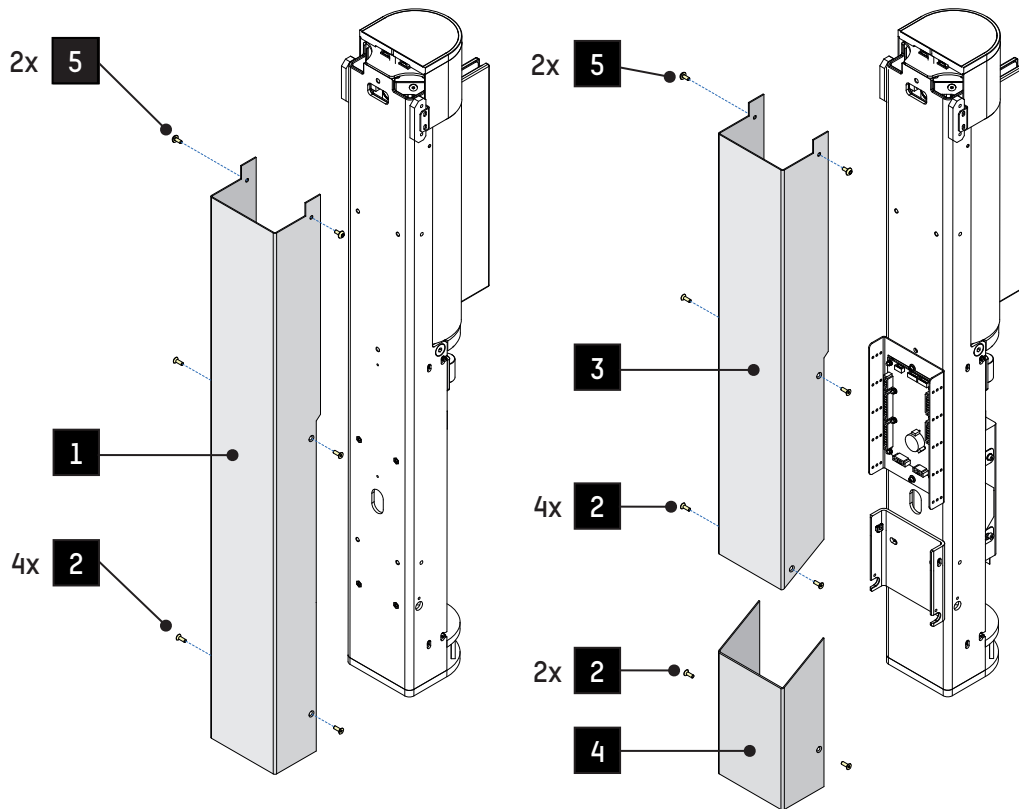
Installing/Removing the kinematics rear cover(s)
